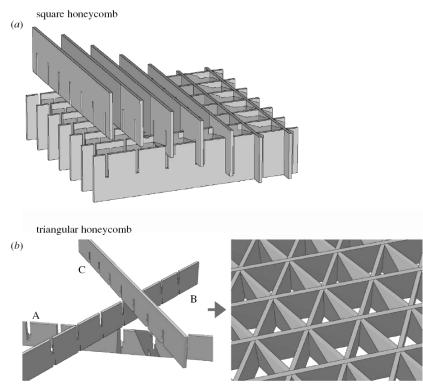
A strip slotting method for making [206]: (a) square honeycomb and (b) triangular honeycombs. The strips can be bonded by brazing.
